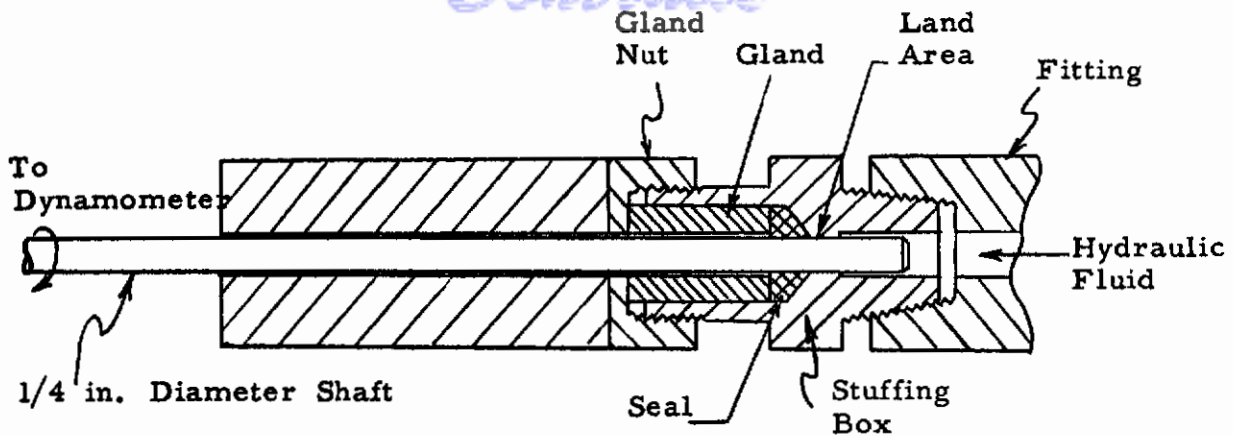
CROSS-SECTION OF ROTATING SHAFT FIXTURE
